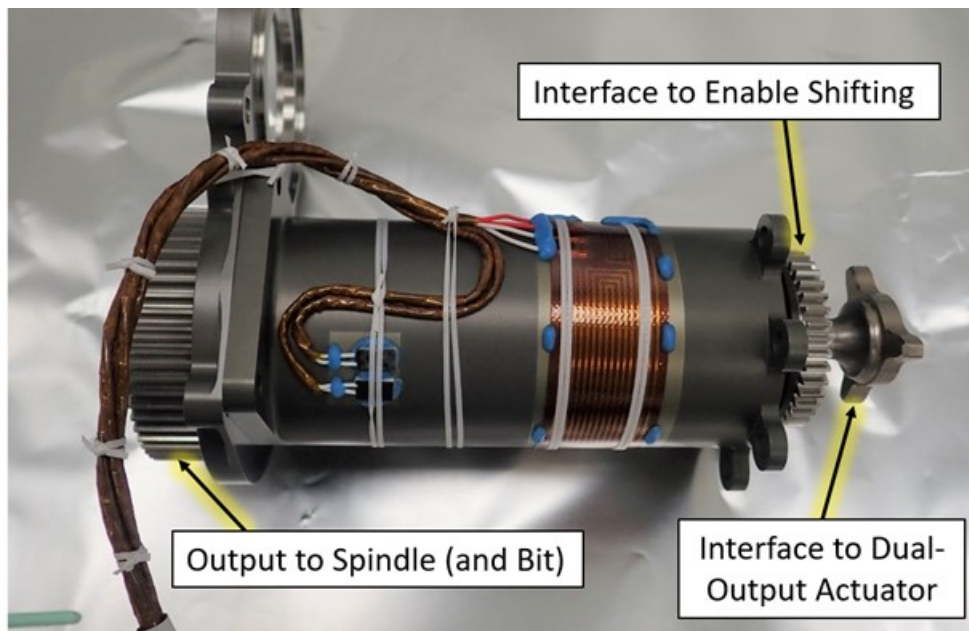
Completed STIG flight assembly. In this image, the left side of the mechanism outputs torque via the large gear to the spindle gear train, and ultimately to the drill bit. The right side of the image interfaces to the dual-output spindle actuator as well as to a separate gear train that determines gear shifts. Also visible in the image are a heater, two platinum resistance thermometers, and their associated cabling. Overall STIG dimensions are approximately 120 mm in length and 60 mm in diameter, with some flanges extending further to serve as covers for other corer components.
